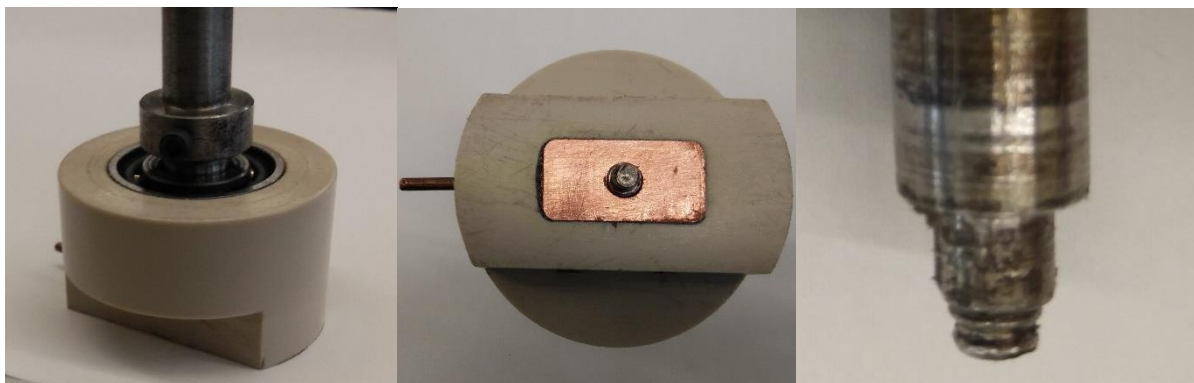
Stationary PEEK tool designed to weld polymers
